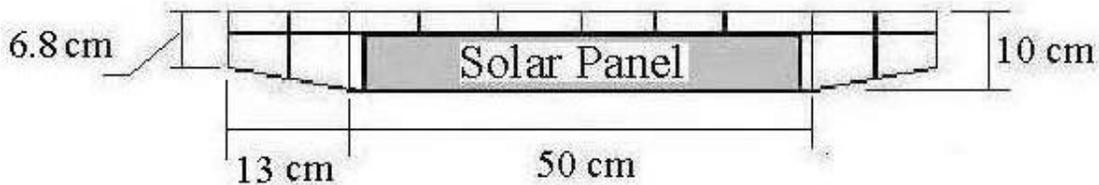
Wing Layout Proposed During Preliminary Design.
